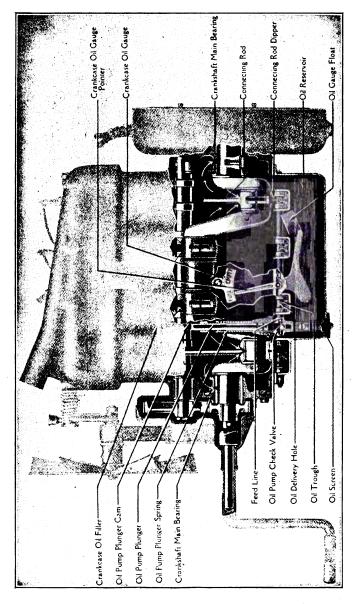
Sectional View of Crank Case of Maxwell Four Cylinder Engine, Showing Typical Constant Level Splash System of Lubrication.
